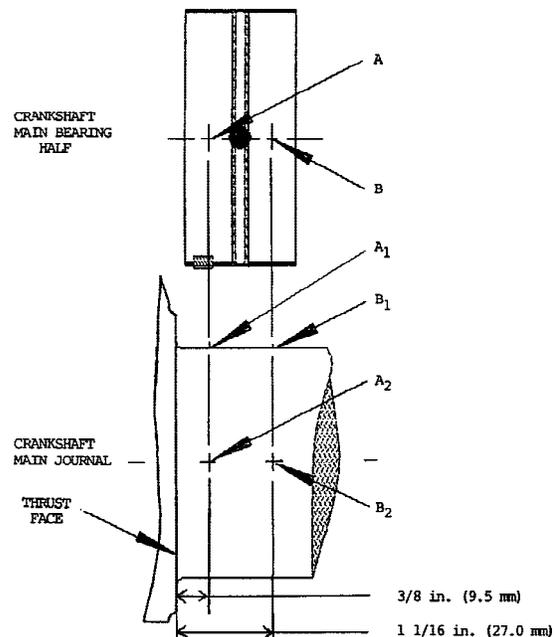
Clearance Measuring Points for Crankshaft Main Bearings
